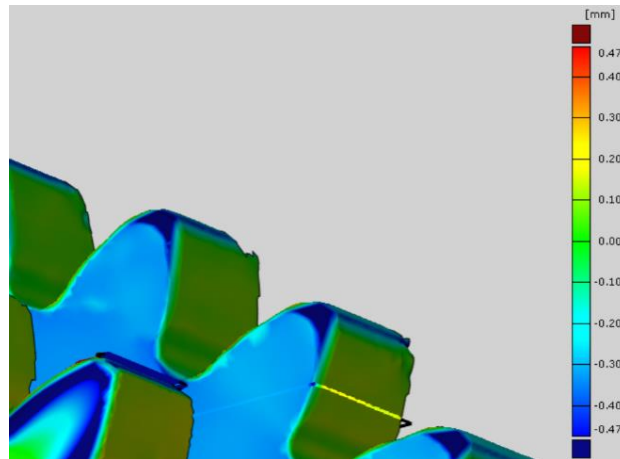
View of the F_β tooth line in the Inspekt GOM program.
